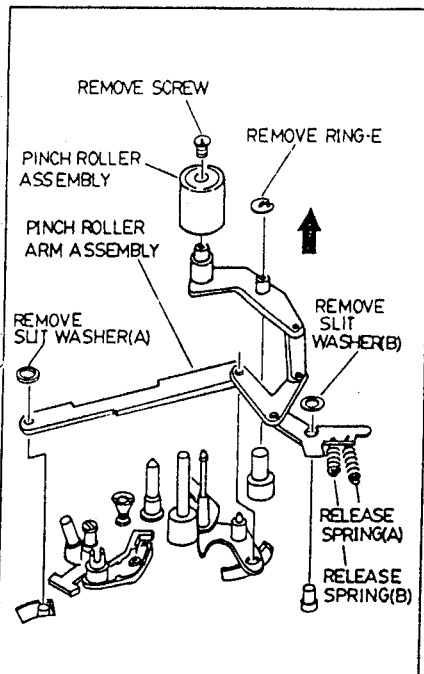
Pinch Roller Assembly and Pinch Roller Arm Assembly Removal
